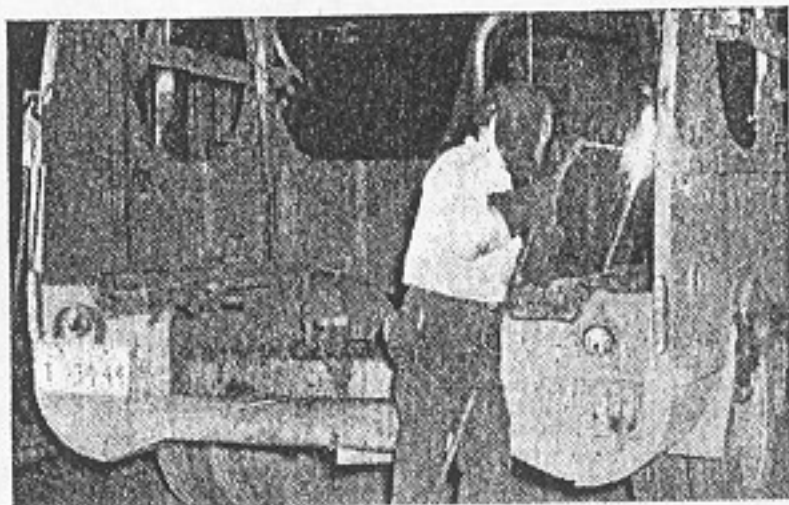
Horizontal welding in making alterations to auto transport trailer.
